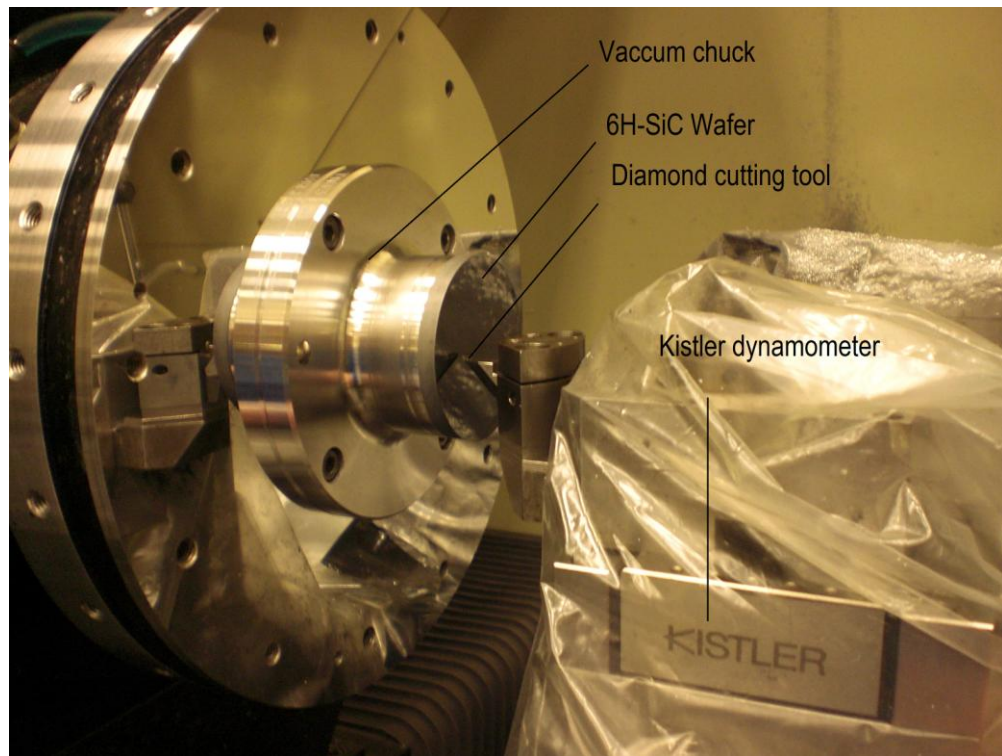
Experimental assembly for SPDT of SiC [280]
